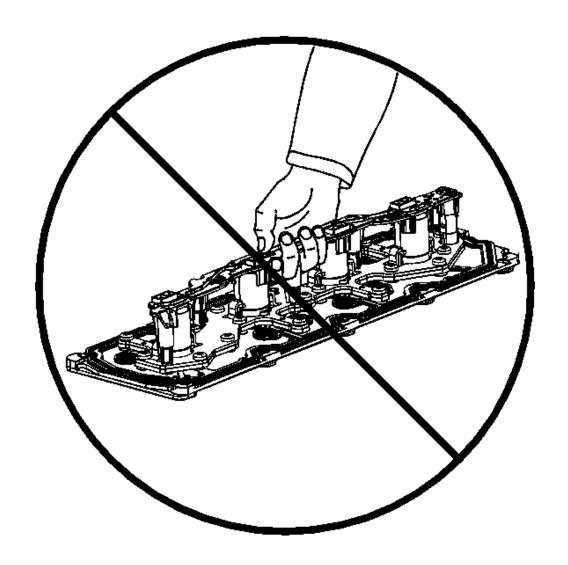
Valve Lifter Oil Manifold Courtesy of GENERAL MOTORS CORP.
